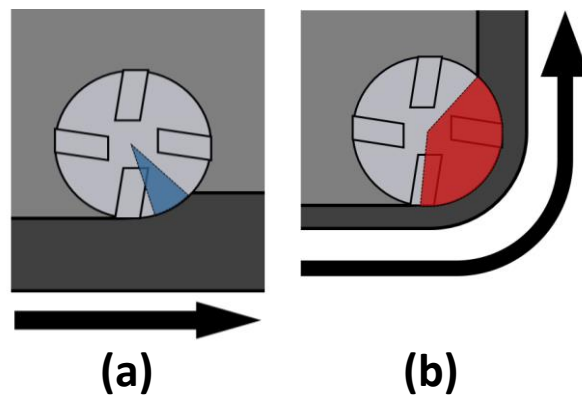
Variable cutter engagement: (a) straight line cutting; and (b) corner cutting
